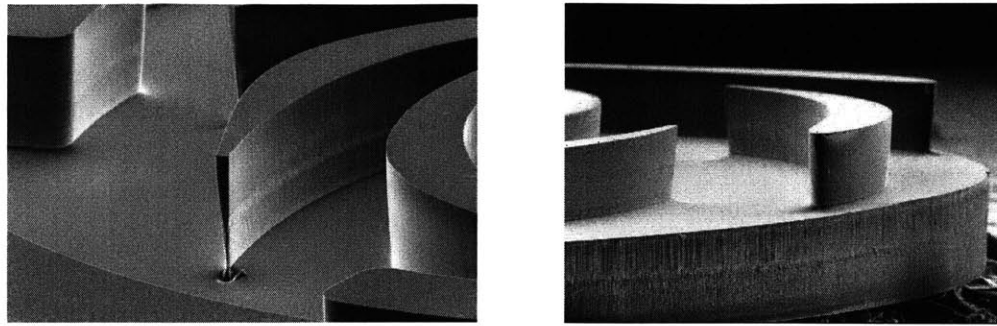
Close-up images of the turbopump rotor showing the pump blades trailing edge (left) and the turbine blade leading edge and the journal bearing edge (right).
